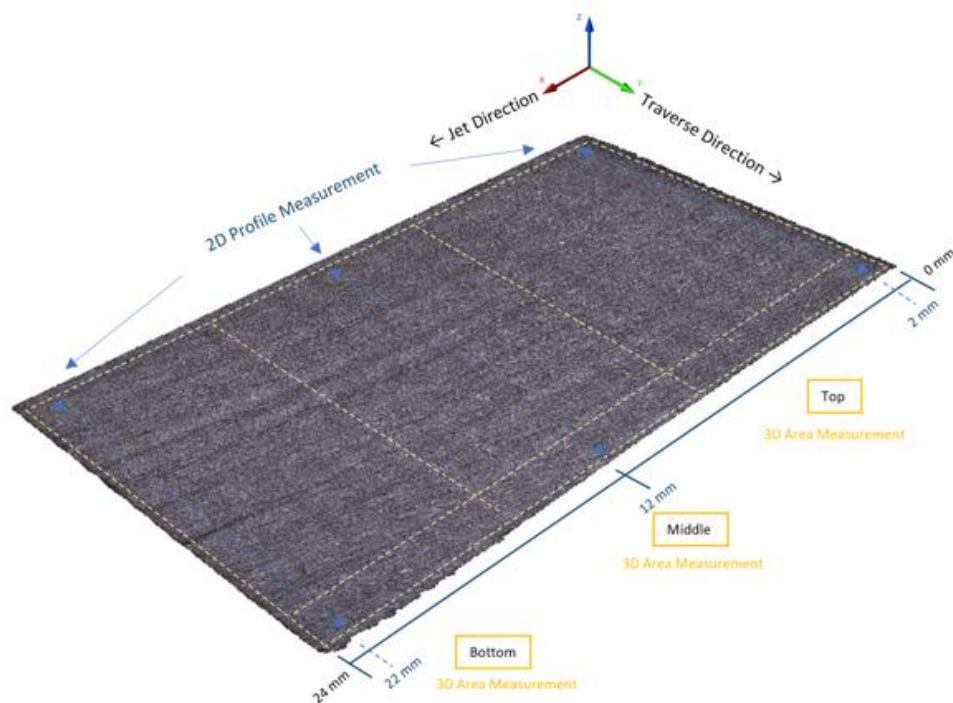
2D measurement of the cutting front surface of AWJ samples.
